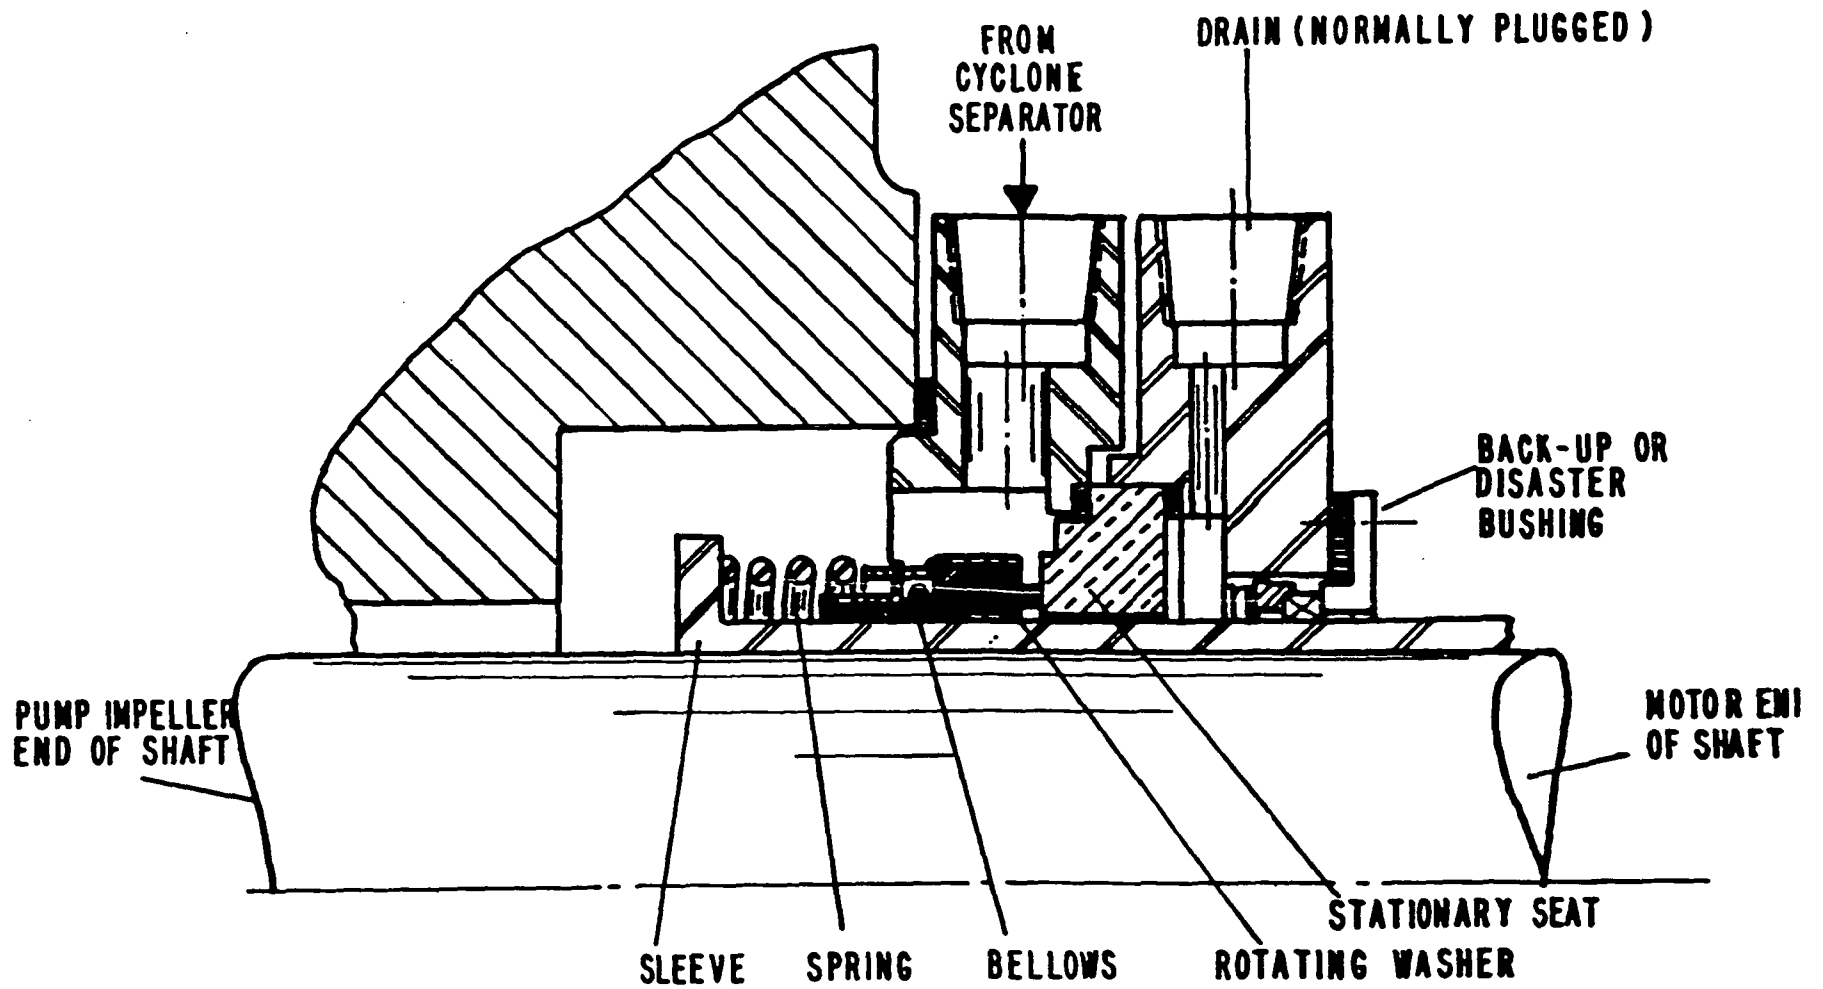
CROSS SECTION OF MECHANICAL SHAFT SEAL USING COOLANT FROM PUMP DISCHARGE
